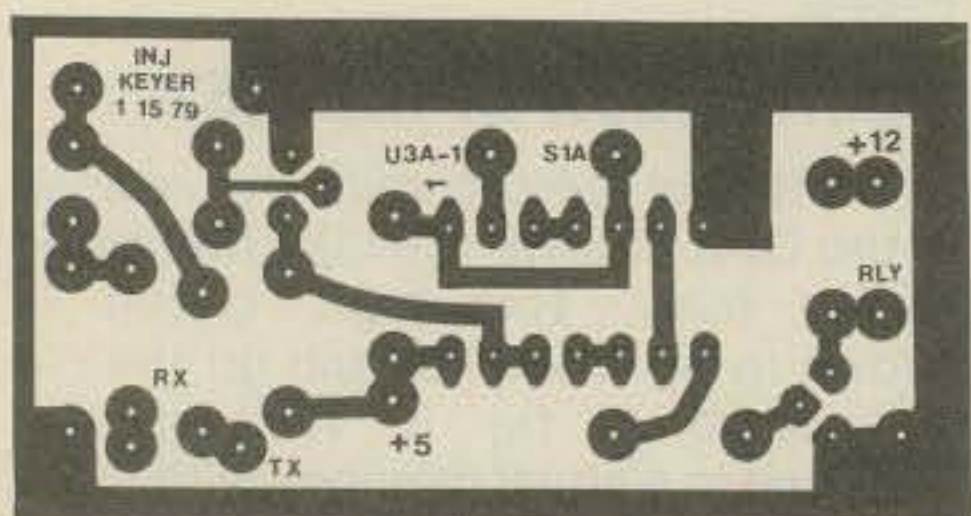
The circuit board layout for the injection cable keyer as seen from the foil side. Shown actual size.
